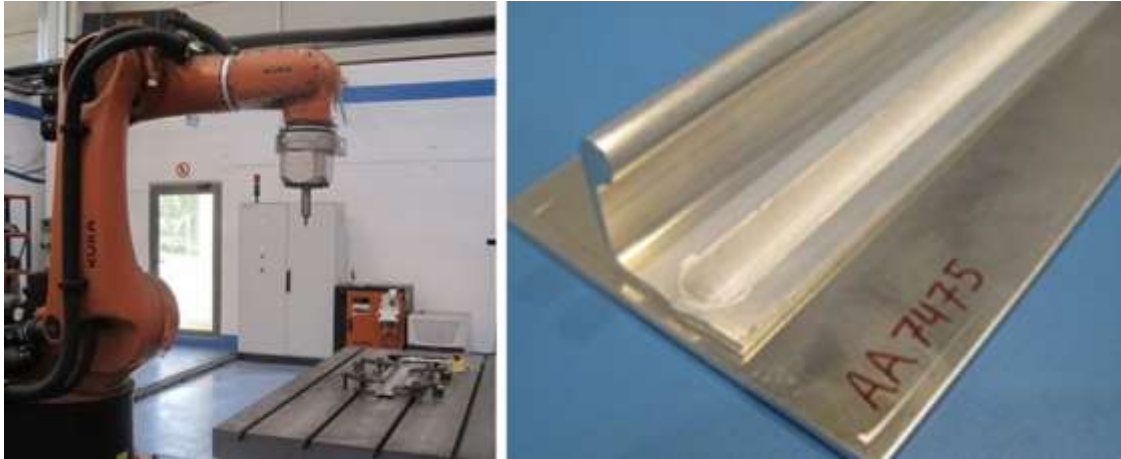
Robotic FSW system at LORTEK used for FSLW tests (left) and a FSLW joint (right) made with AA7050-T7651 extrusion (stringer) and AlcladAA7475-T761 sheet (skin) [74].
